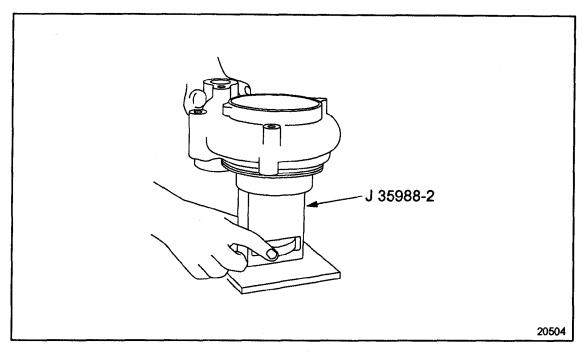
Water Pump Impeller Installation Set-Up (FM)
